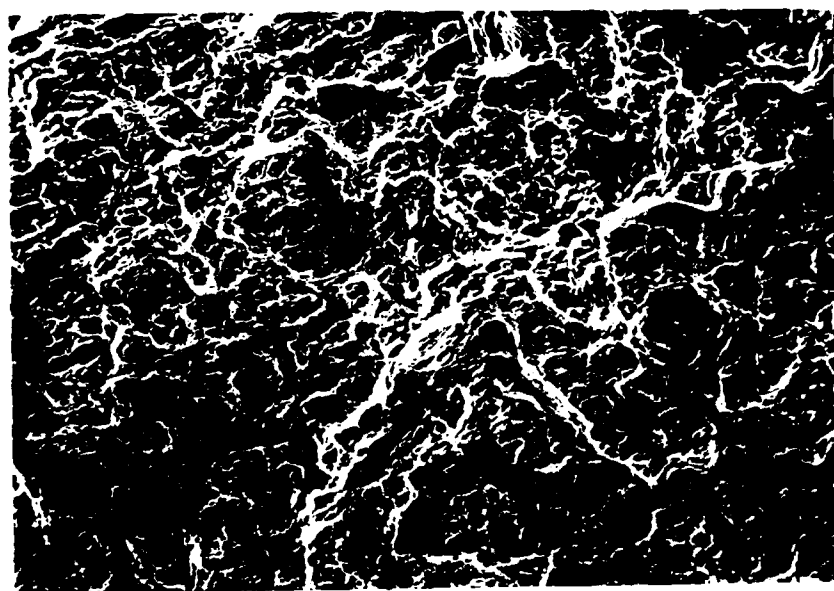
Fast fracture surface of 7075 aluminium (HRB45).
